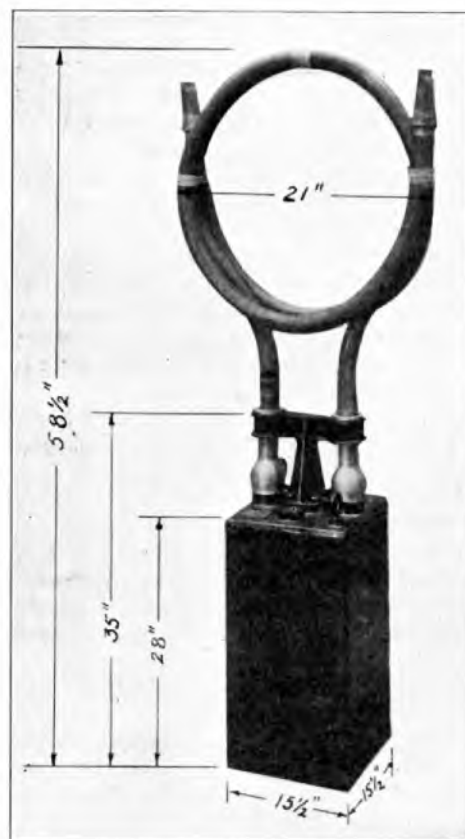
SHEET STEEL TYPE OF LOADING POT.
